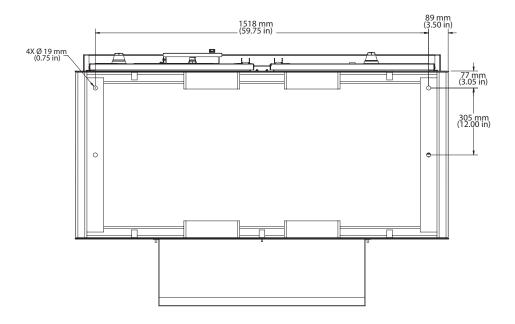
Main Inverter Anchor Bolt Pattern, Bottom View
